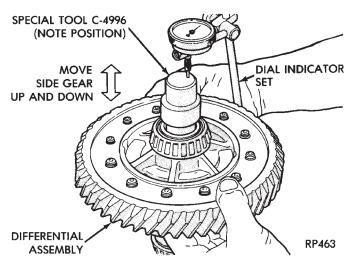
Checking Side Gear End Play CAUTION: Side gear end play must be within .001 to .013 inch. Four select thrust washers are available: .032, .037, .042, and .047 inch.
